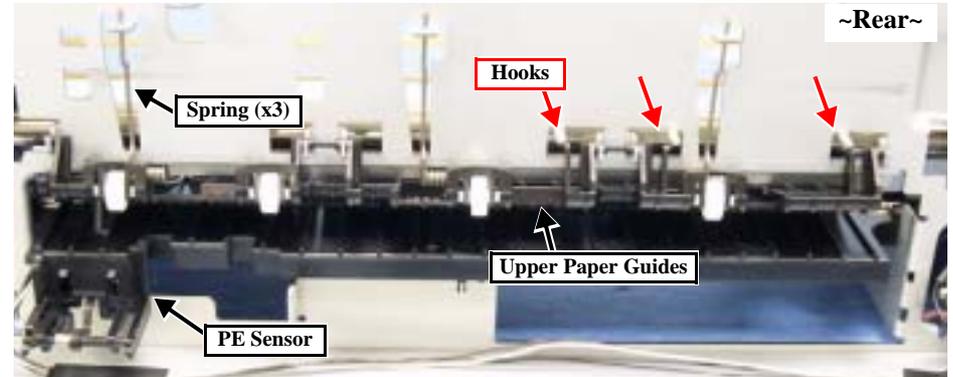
Upper Paper Guides Layout (rear of the printer)
